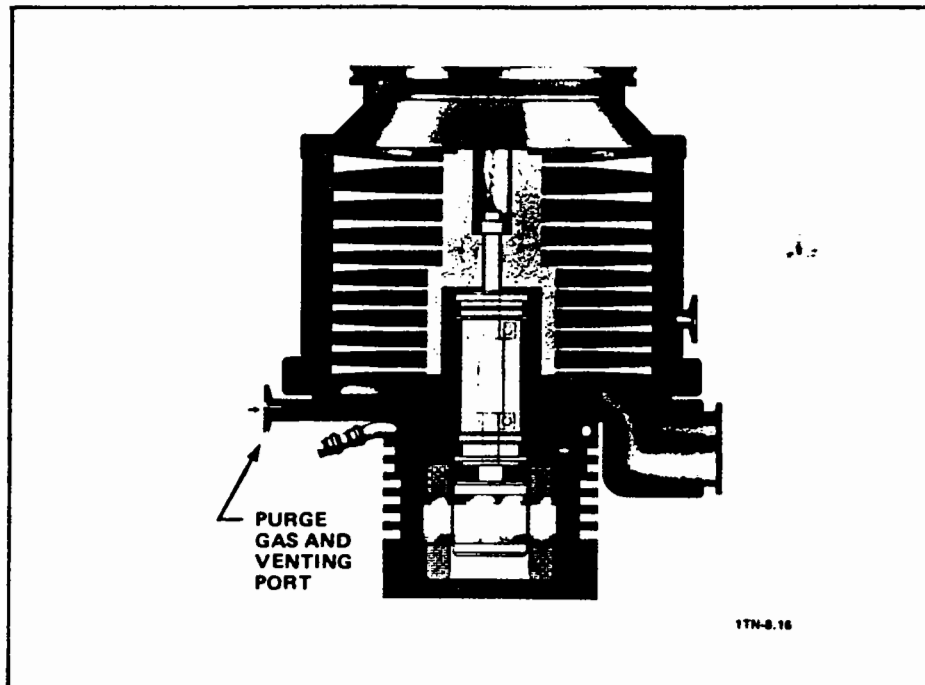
TMP-1000C Sectional View showing Inert Gas Seal
